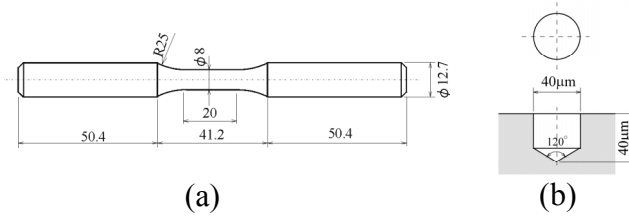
Fatigue test specimen. (a) Shape and dimension of the specimen for reversed torsion and combined push-pull/torsion fatigue tests; dimensions in mm. (b) Artificial small hole.
